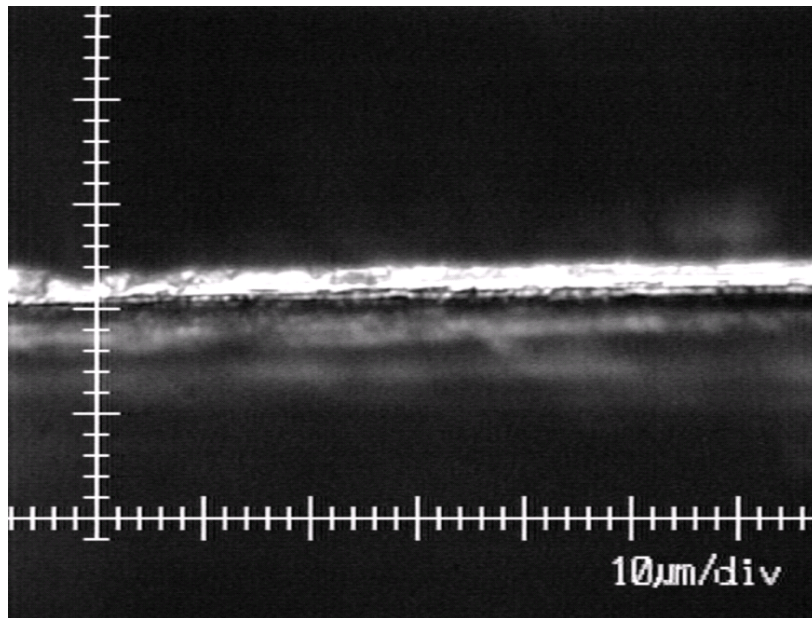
Cutting tool edge with a tool of 40° rake angle and 5° clearance angle.
